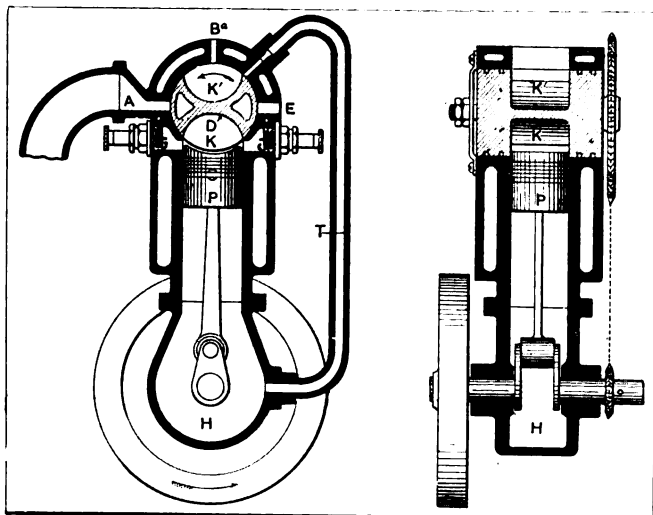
Sectional views through the Cottin motor, showing the shape of the rotary valve and the method of driving the valve by means of silent chain
